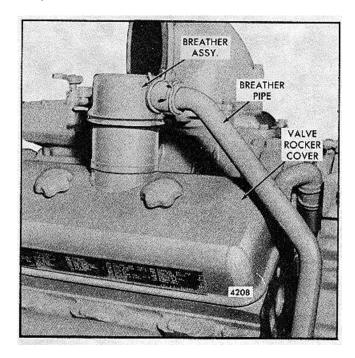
Typical Mounting of Breather Assembly on Valve Rocker Cover
